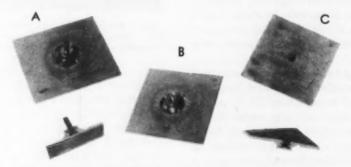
FIG. I—Inserts are made integral with utensil parts through cold pressure welding. View A shows a threaded insert trap welded into an aluminum sheet, A 1/2-20 thread was formed in plate B by welding a male steel insert into the aluminum, then removing the insert. View C shows a threaded female steel insert trap welded to the plate.
